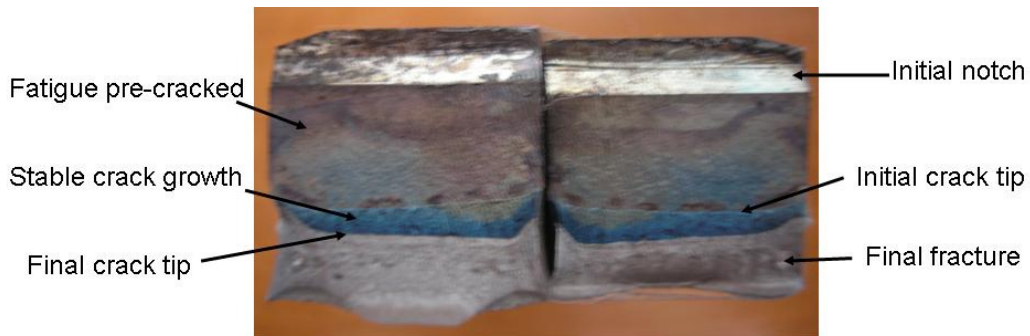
Fracture surfaces of SENB specimen with a pre-crack in WM.
